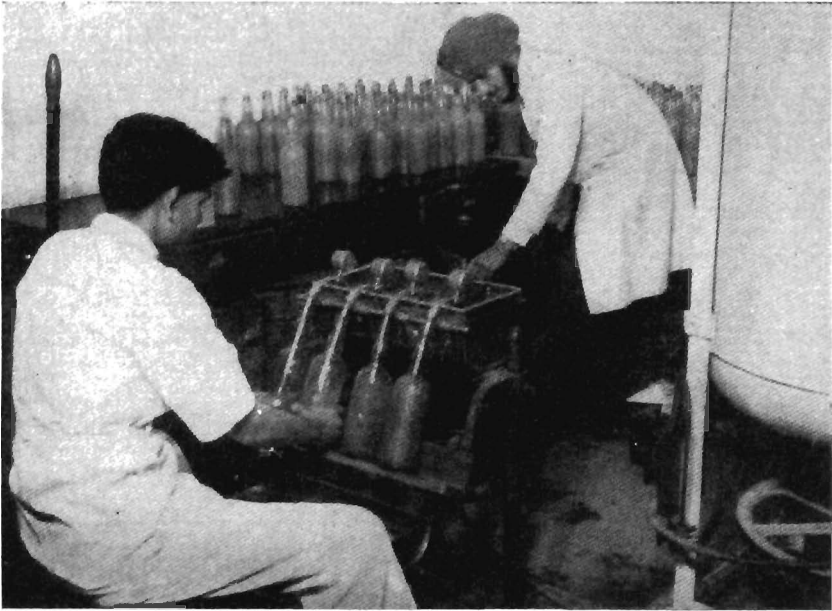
BOTTLE FILLING MACHINE (Syphon pipe filler)
